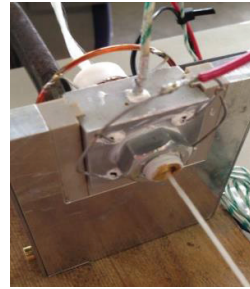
Detailed view of the mold in the heater with the yarn entering from above and the filament leaving the at the bottom.
